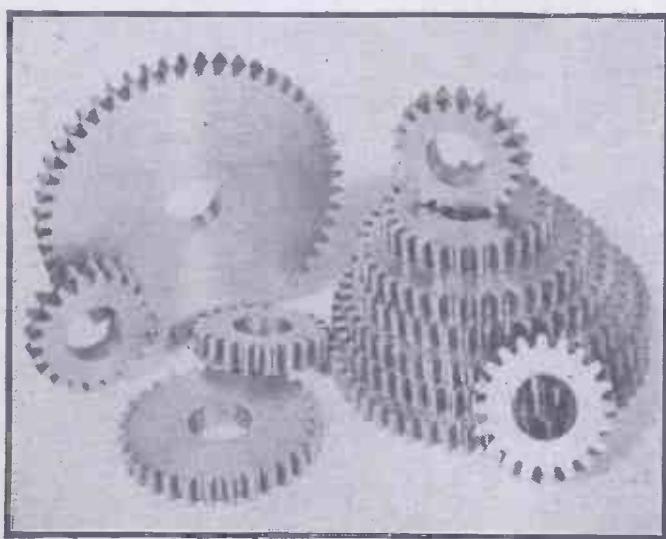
Set of 12 home-cut gears for lathe change wheels.
